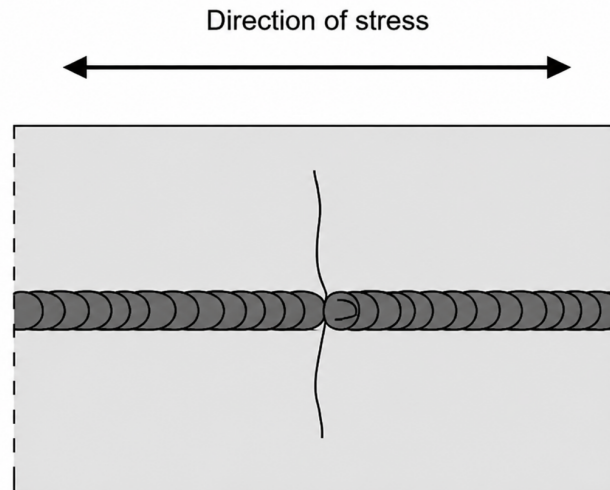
Example of a weld discontinuity causing local stress concentrations that may contribute to fatigue crack initiation [3].
